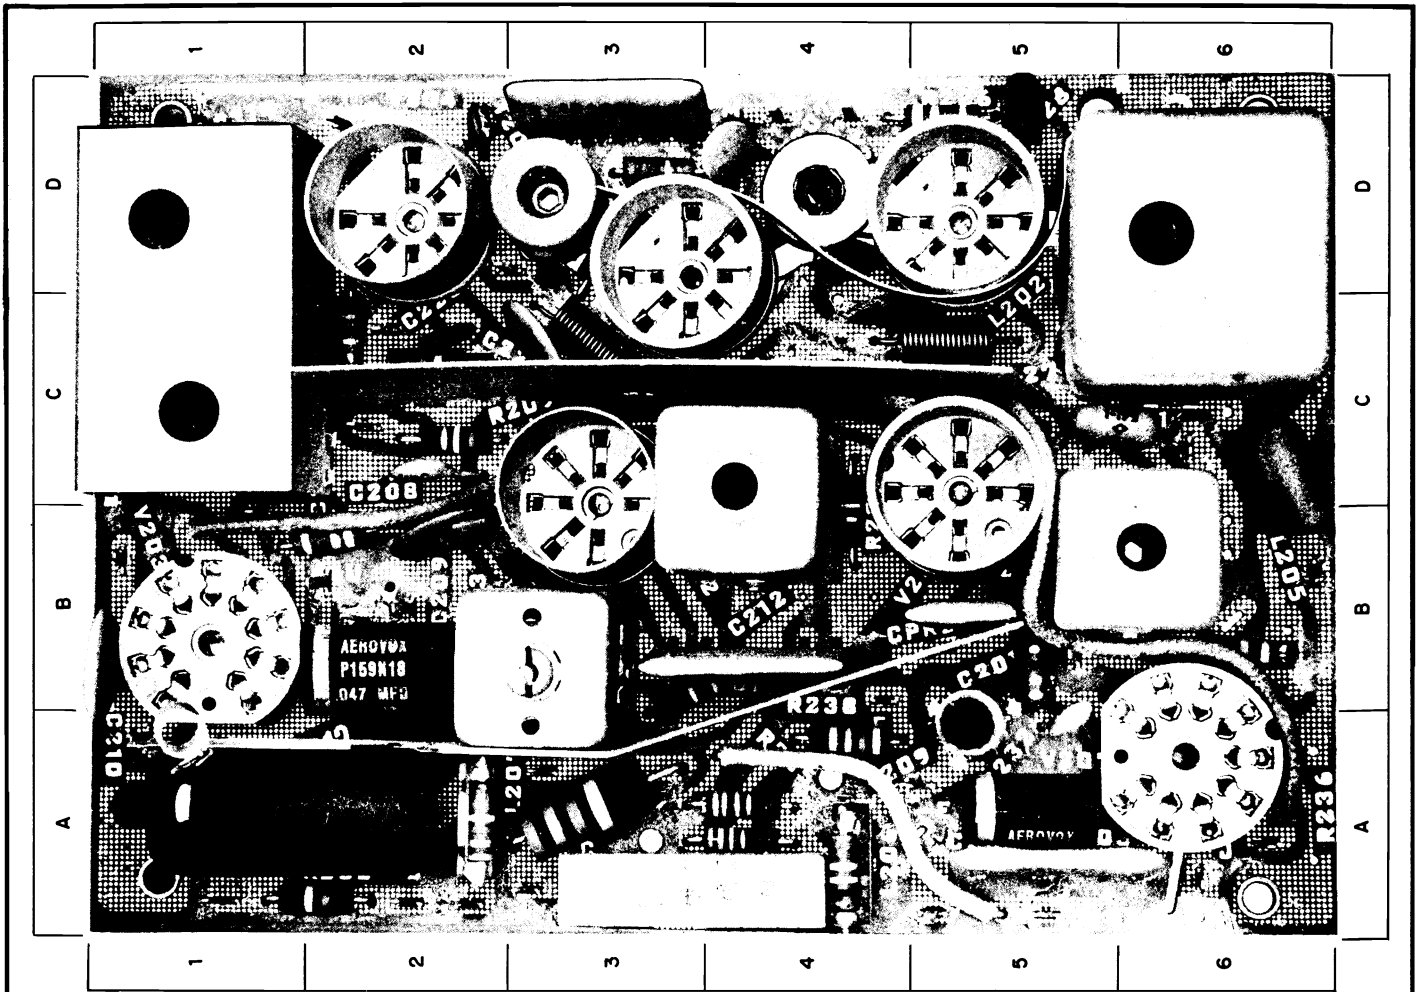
PW200 Sealed Circuit I-F and Video Assembly Component View
